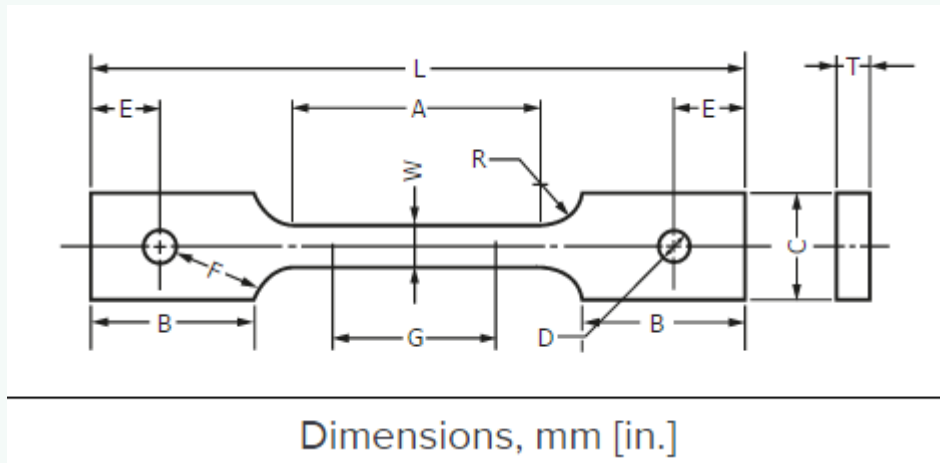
Pin-Loaded Tension Test Specimen with 50-mm [2-in.] Gauge Length
